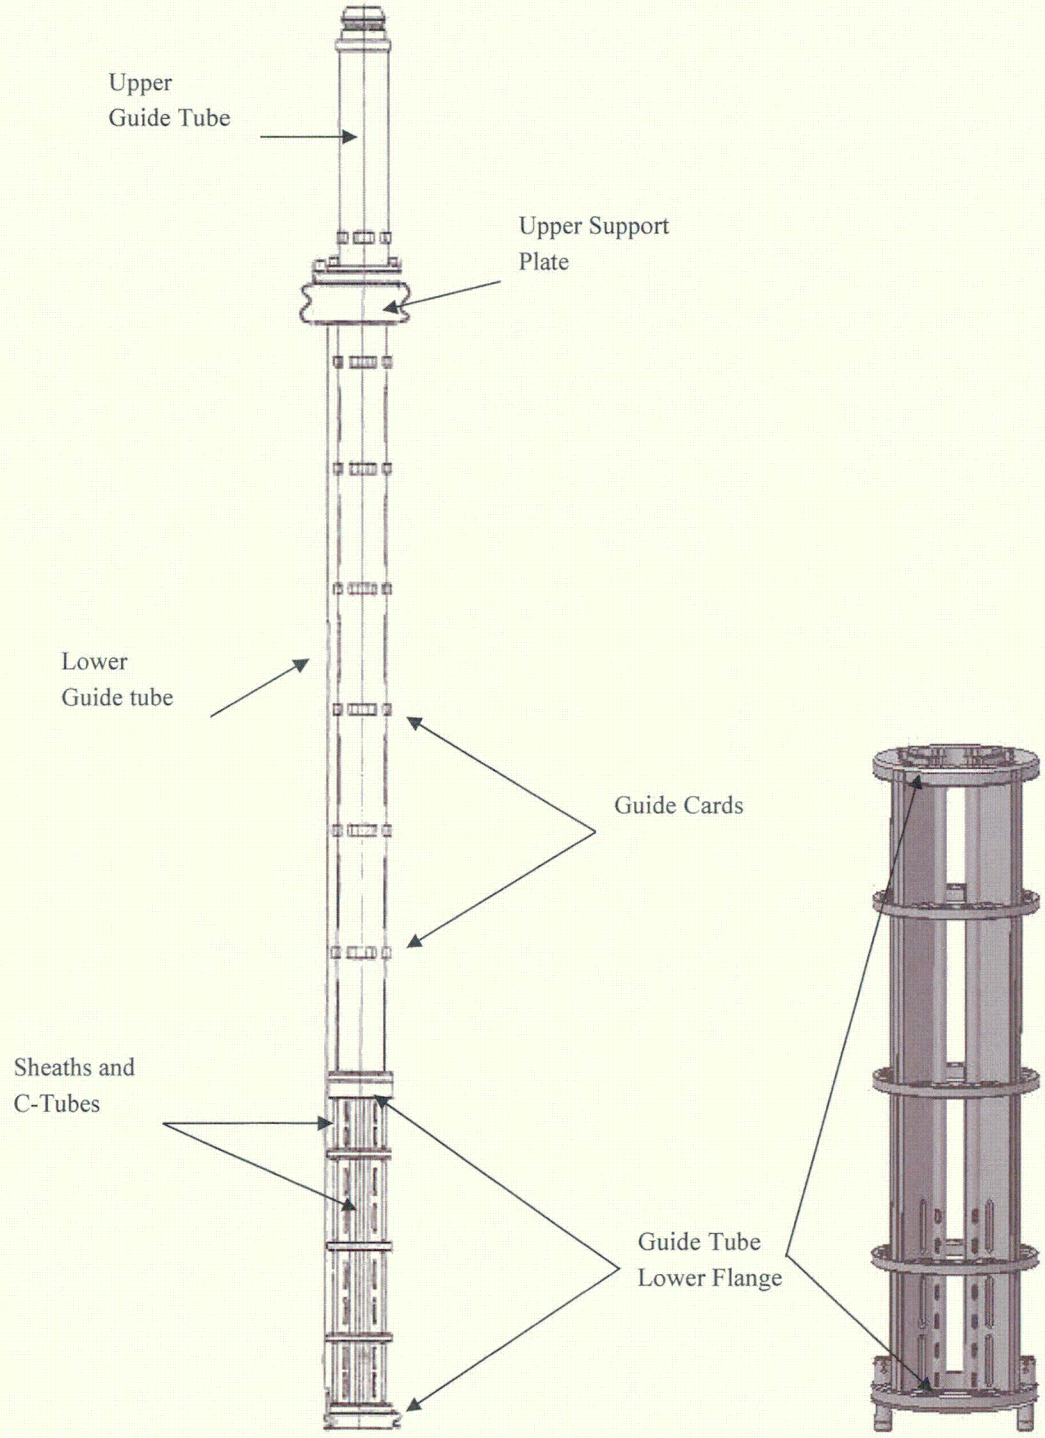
Typical Lower Section of Control Rod Guide Tube Assembly
